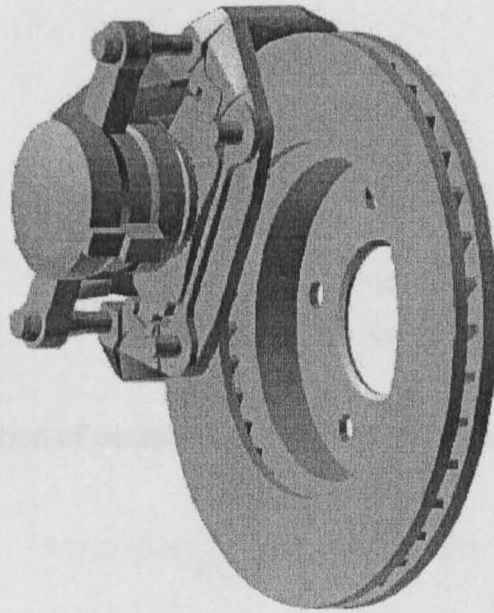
Smooth rendered FE model of the Mercedes vented disc brake assembly
